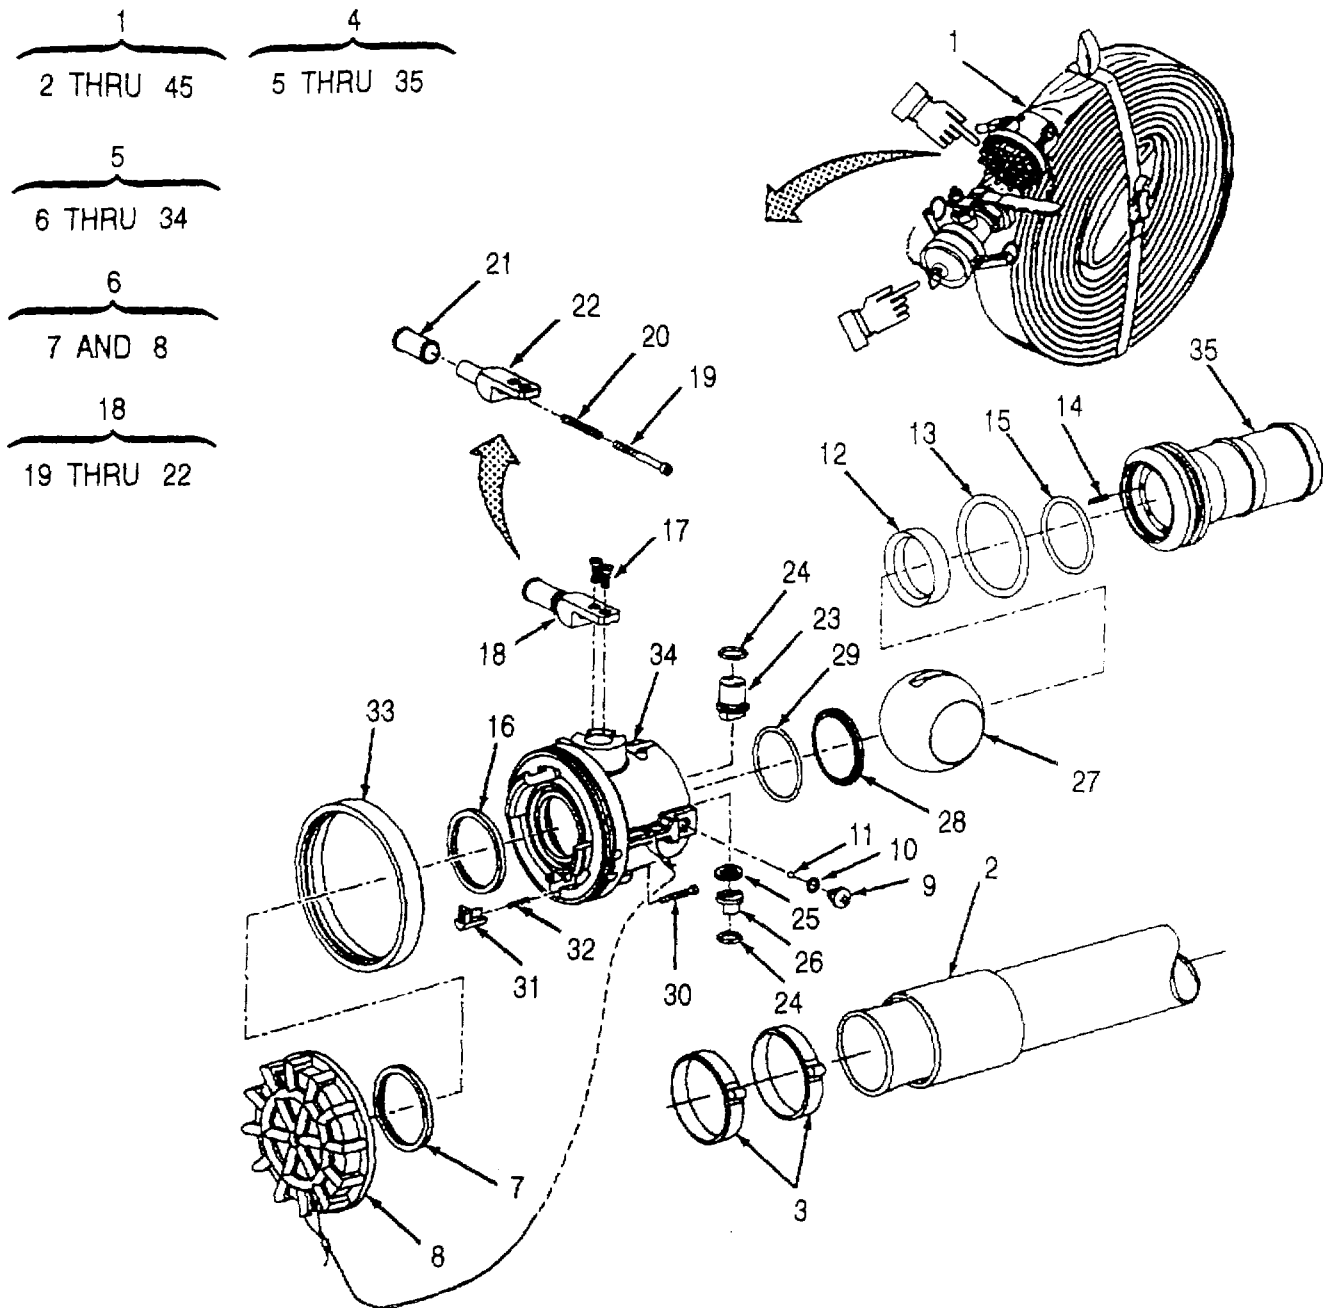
Discharge Hose Assembly (Sheet 1 of 2)
